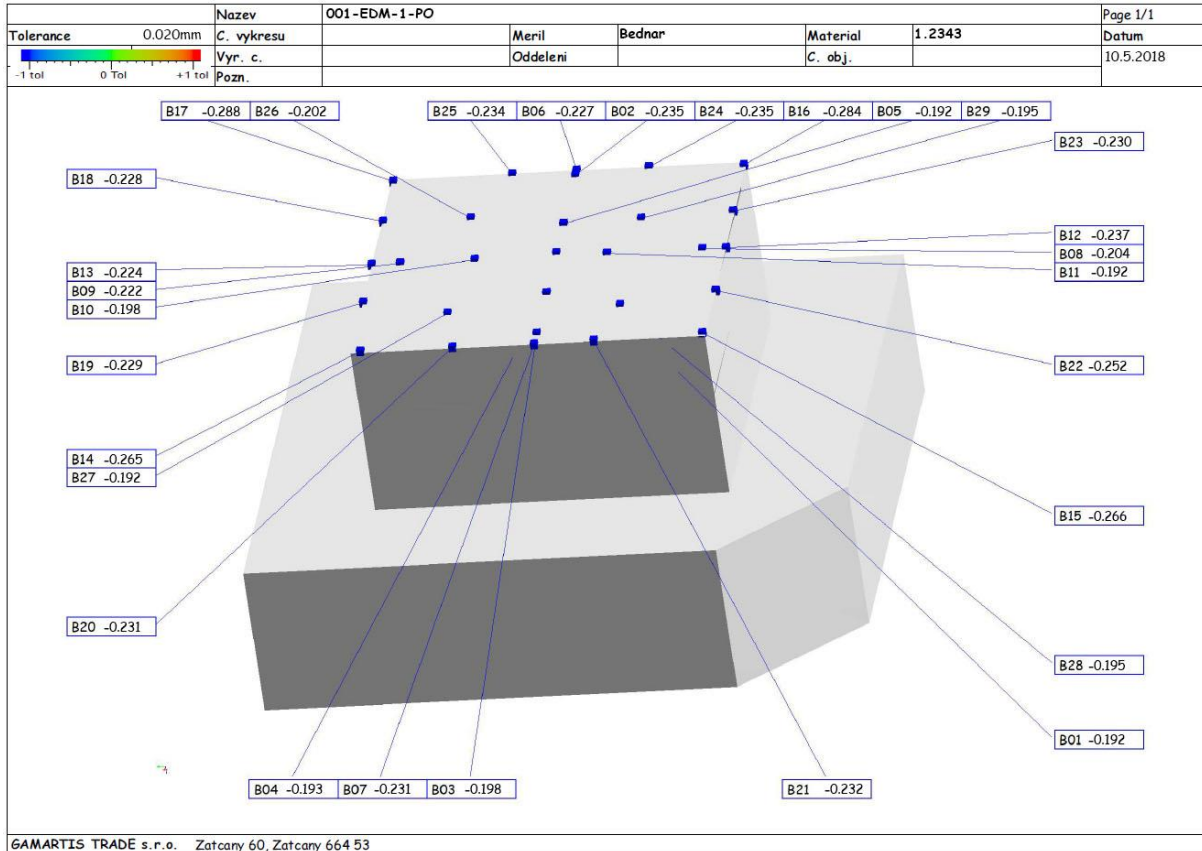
EDM-1 square shaped tool electrode measurement protocol after the EDM.
